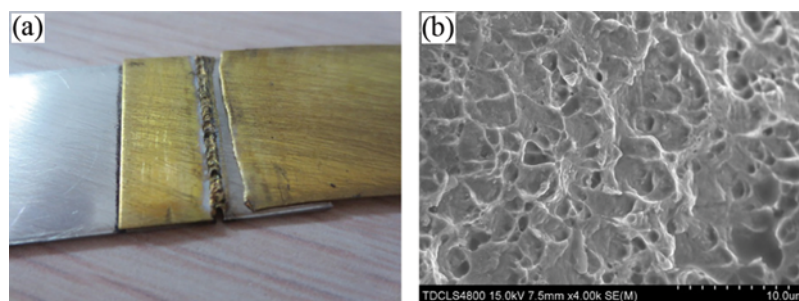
Fracture surface morphology of welded joint.
